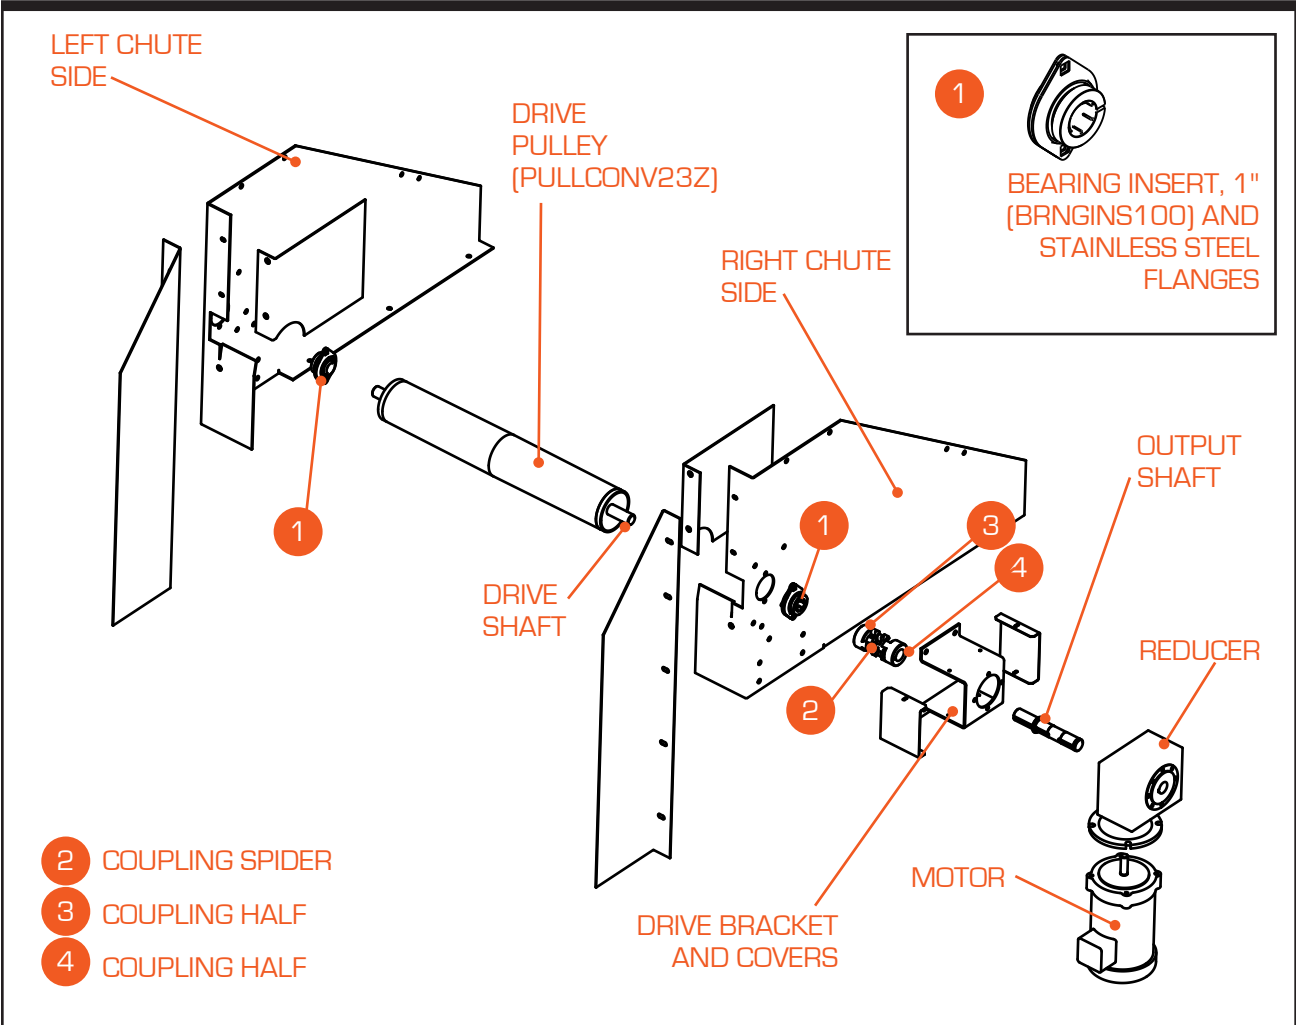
Drive Pulley (Head) with DC Motor/Reducer Sub-Assembly
